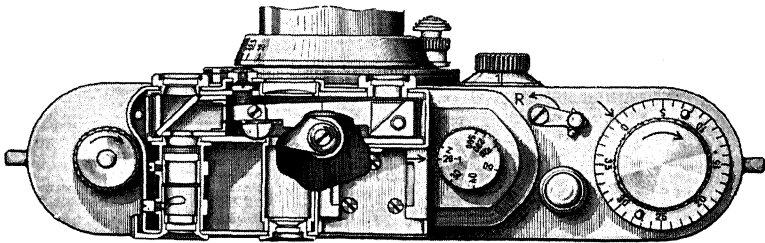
Looking down on cross-section view of range finder and view finder housing. Note position of range finder prisms, the right prism is moved by the bar which contacts the flange of the rotating lens mount
